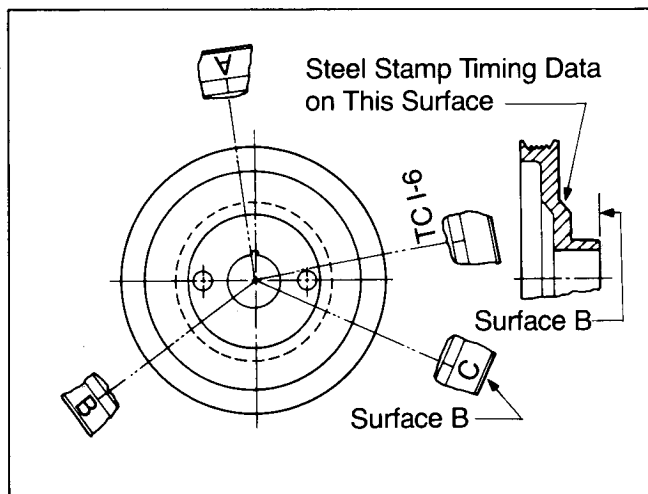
, (K11920). Accessory drive pulley marking — KT(A)-1150
